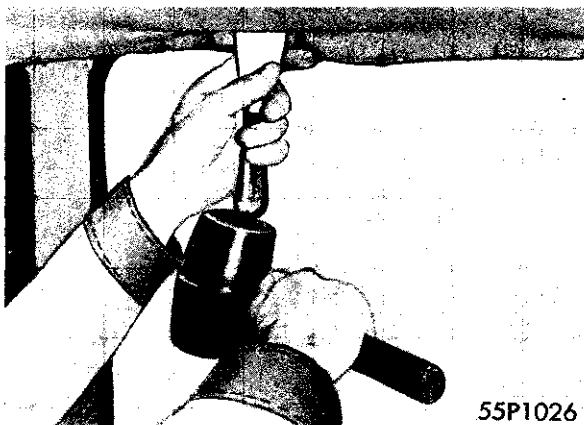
Tucking Headlining between Roof Rail and Retainer
